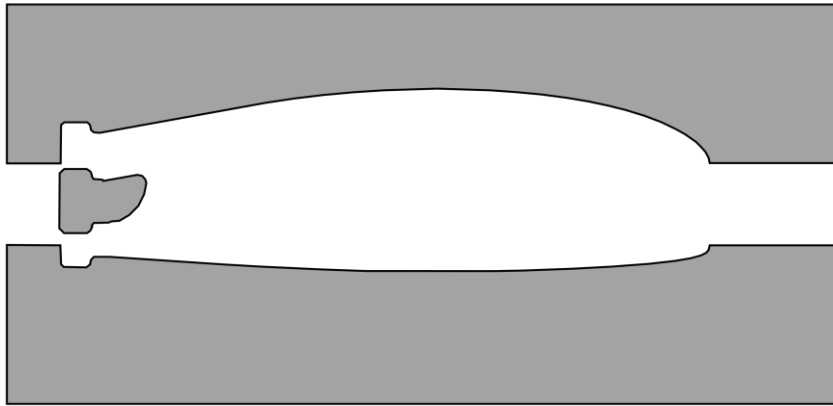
Mold Cross Section with Upper Mold, Lower Mold, and Trailing Edge Insert
